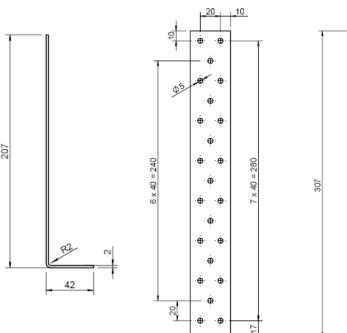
Dimensions of Timber-concrete steel anchor 40 x 200 x 2.00
